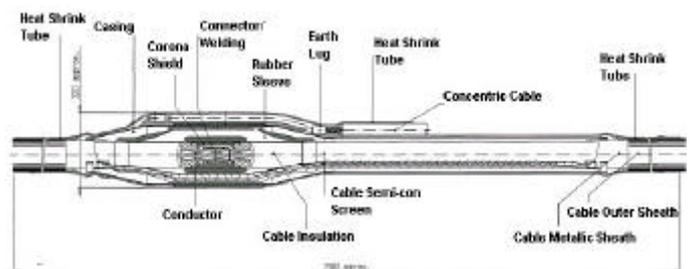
Insulated Joint for extruded cables with Cu or Al conductors
